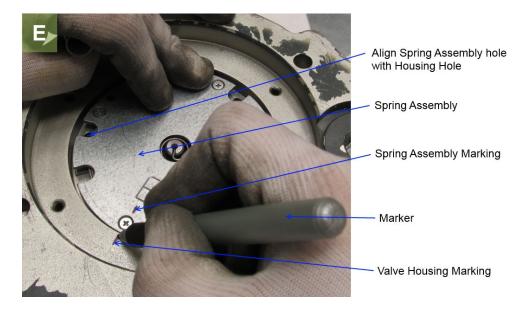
Mark Return Spring and Housing, Rotating Spring
